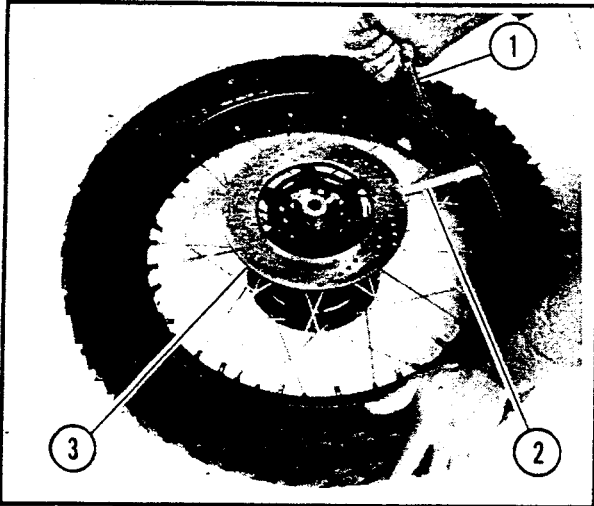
Pulling Tire Bead Over Edge of Rim
